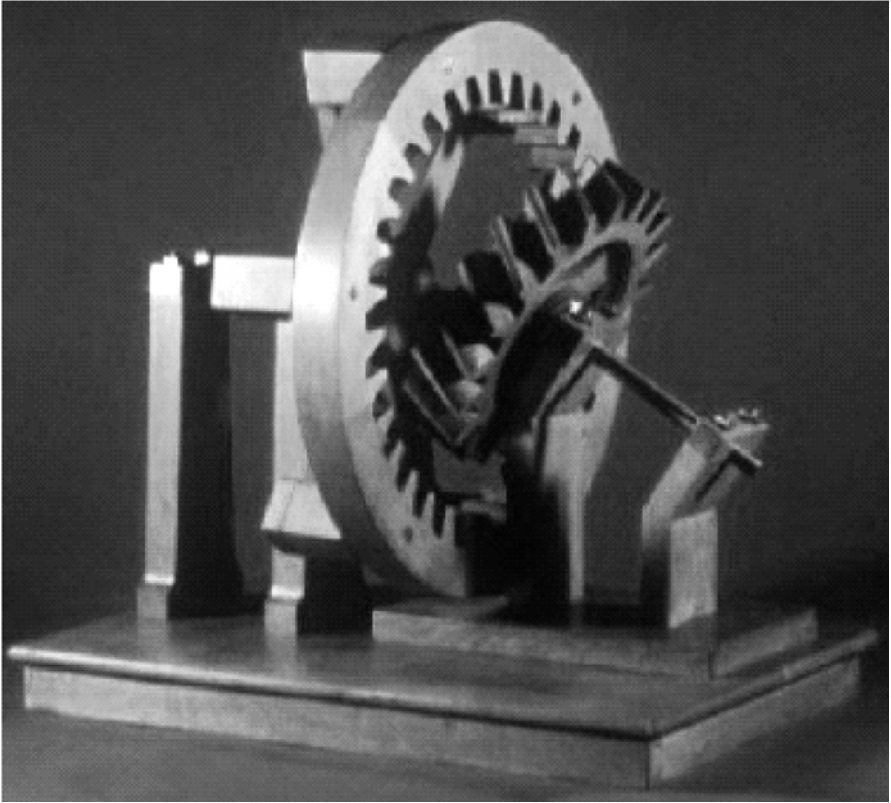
Two gear wheels with a skew layout of their axes of rotation; external gearing (Musée des Arts et Métiers, No. 5455-).
